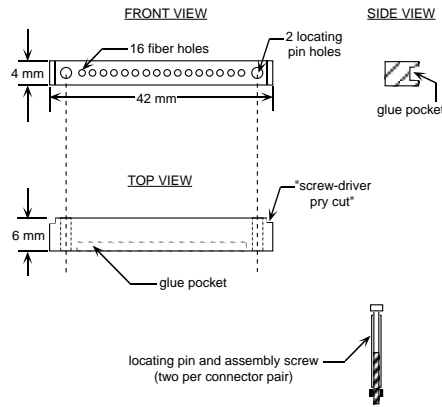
Schematic drawing of a 16 channel connector designed to be placed at the end of the triangular scintillator strips
